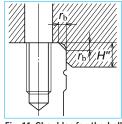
Shoulder for the Fig. 11 Shoulder for the ball rail datum face
